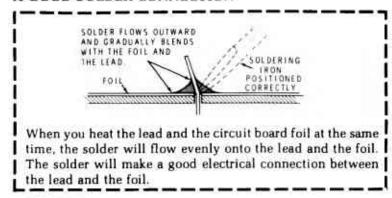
on page 9 shows how to make a good solder connection. For best results, the soldering iron should touch <u>both</u> the component lead and board at a 45° angle so that both are properly heated and will accept the solder. If you notice a buildup of old solder and rosin, you should clean the soldering iron tip.
